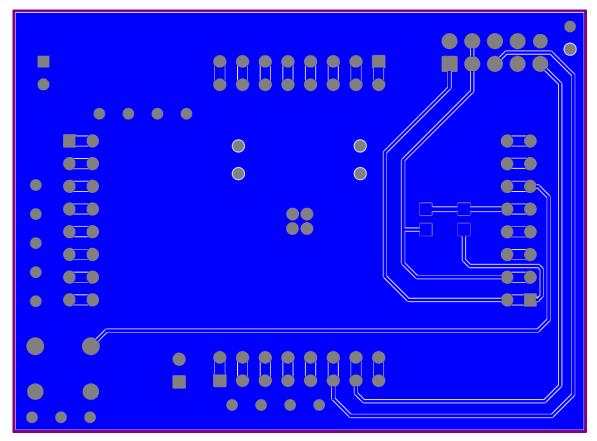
IS3XCS8977 EB PCB Layout - Bottom Layer
